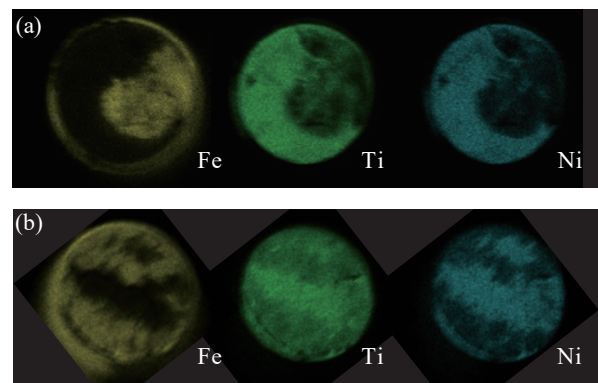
EDX images observed at the fracture surfaces of the joints directing welded for: (a) J1 and (b) J6.
